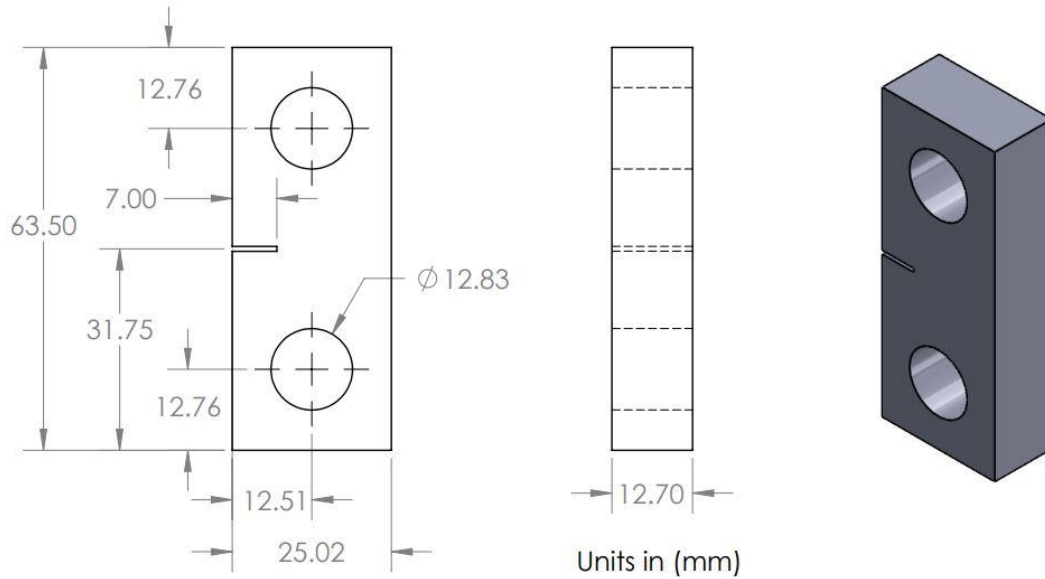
5: SEN specimen geometry used in testing the fractured wrought IN718 C(T) halves.
